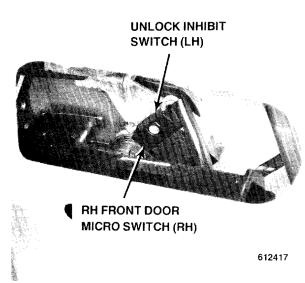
Inside Rear of LH Front Door (RH Similar)
